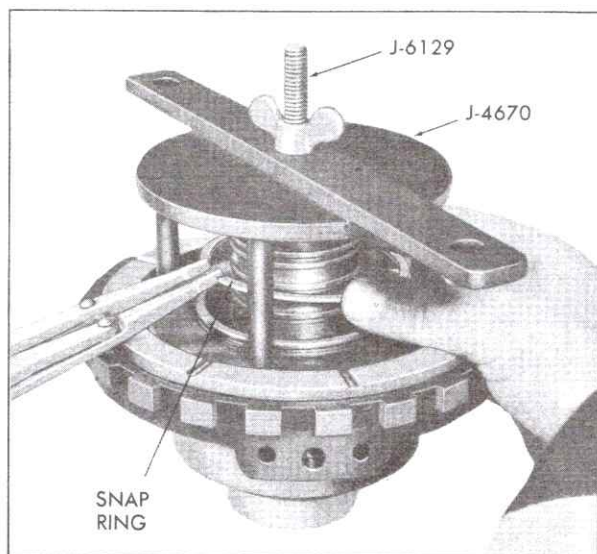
Removing and Installing Intermediate Clutch Piston Snap Ring
